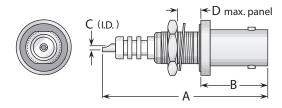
(Bulkhead jack receptacle, front mount, with mounting gasket)
